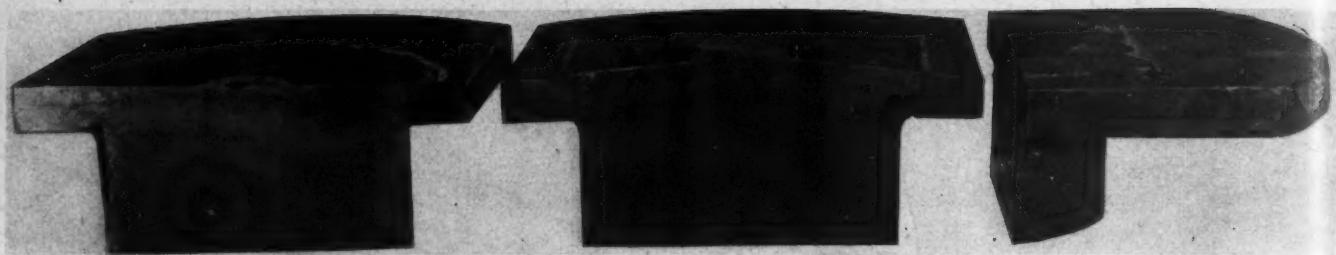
(above) Same castings shown in Fig. 12, sectioned. Note humping of one casting caused by upward bulging of gypsum core; (left)—carbon, 6½-in. diameter by 1⅜-in. diameter hole; (middle)—gypsum, 6-in. square by 1⅜-in. diameter hole.
